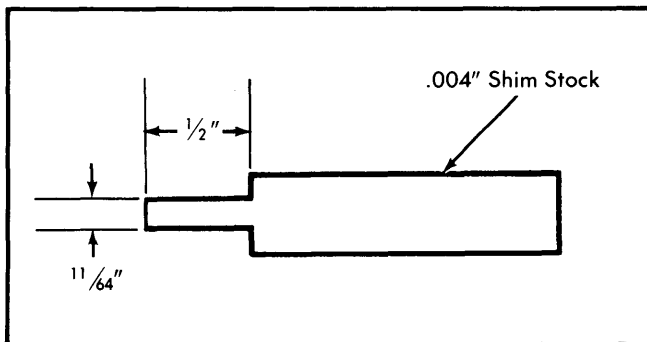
Rear Main Bearing Oil Seal Installation Tool
